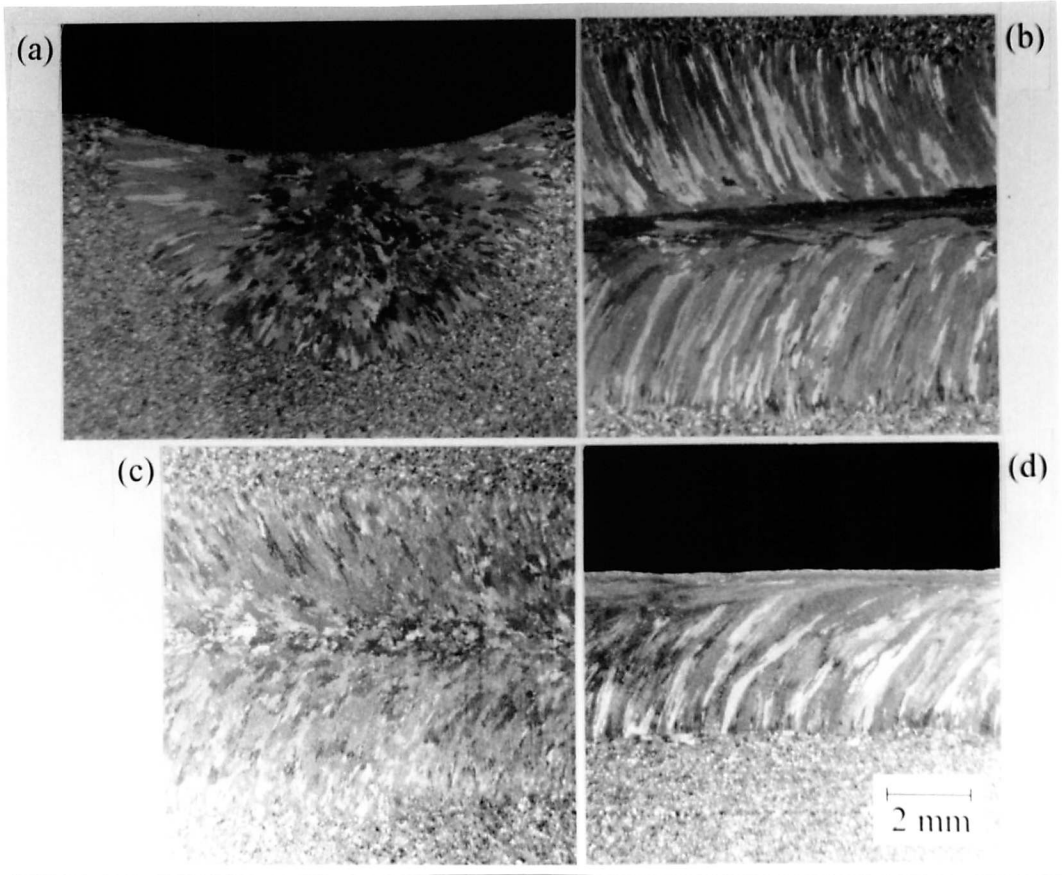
As-welded surface of the BN inoculated deposit.
